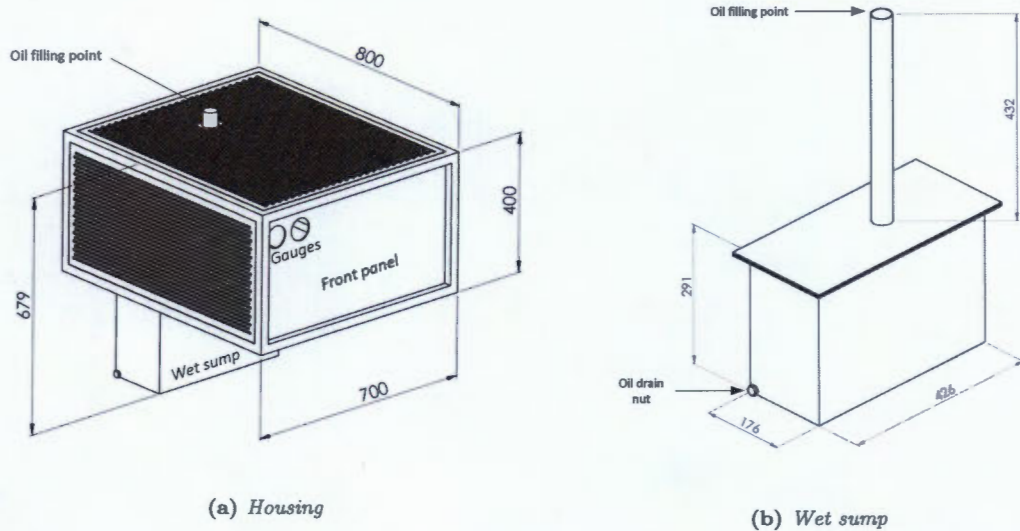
Three-dimensional representation of the conditioning unit housing (a) and wet sump (b) assembly.
